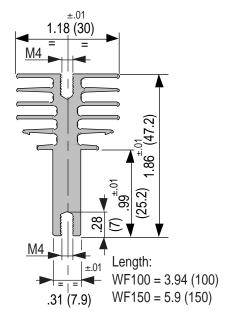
WF100 and WF150 heat sinks; dimensions in inches (mm)
